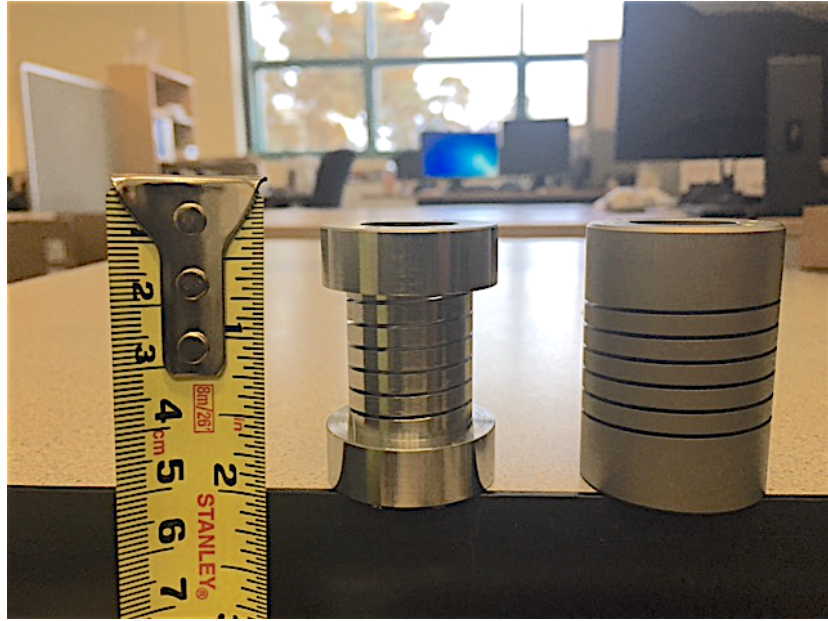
Comparison of Helical Machined Spring before and after Material Removed
